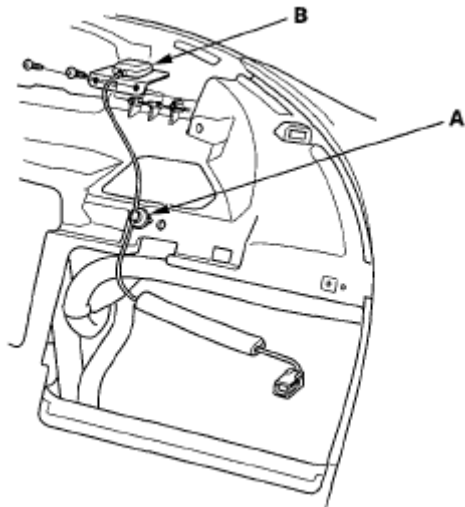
Identifying Wire Harness Clip, Screws And GPS Antenna
